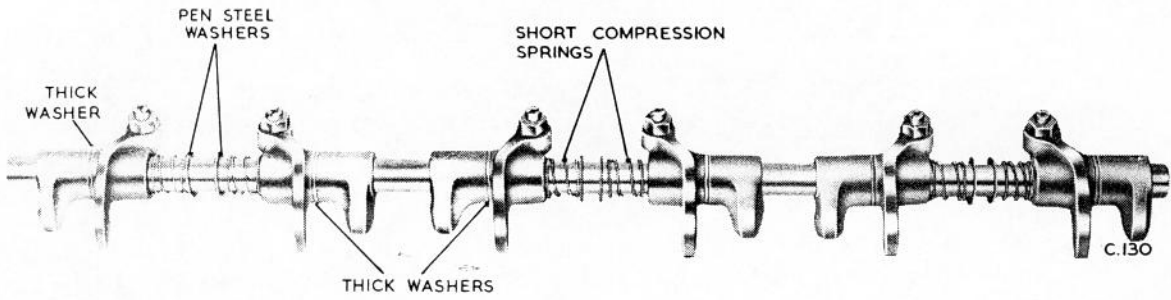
Fitting inlet rocker spindle assembly (Stage 1)
